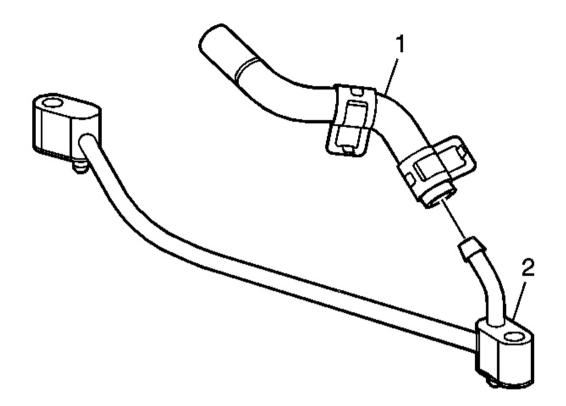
Coolant Air Bleed Hose & Pipe Courtesy of GENERAL MOTORS CORP.
